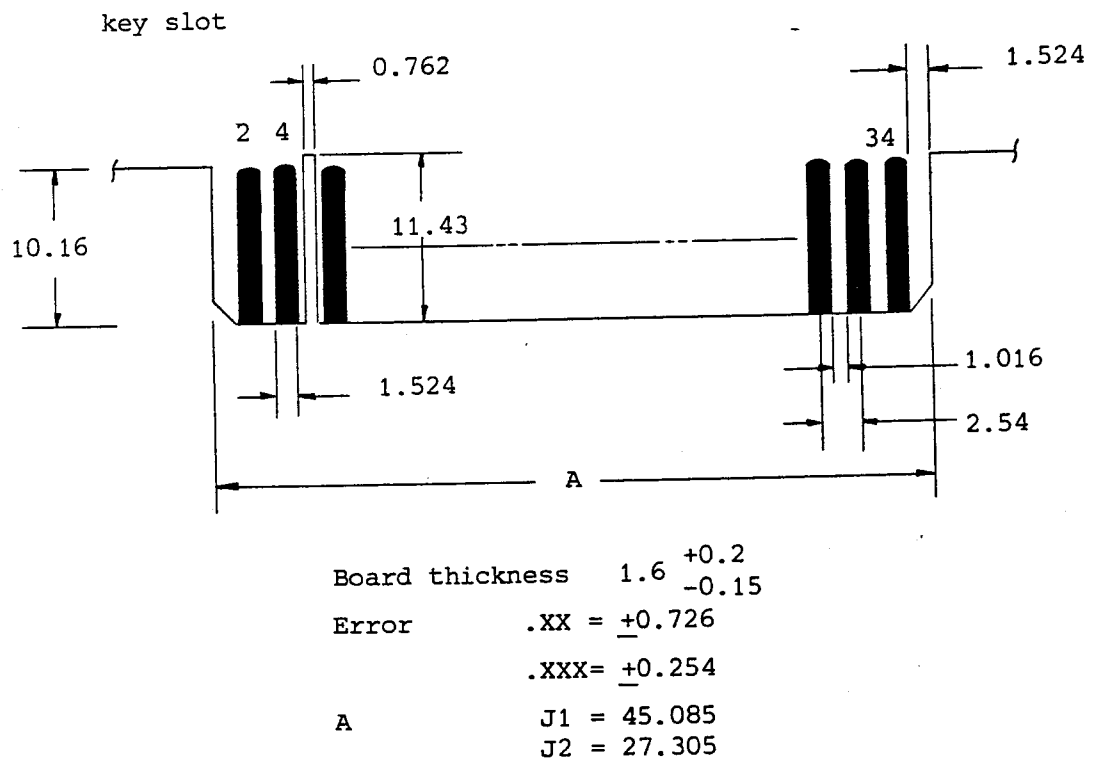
D5104 J1/J2 Connector Dimensions
